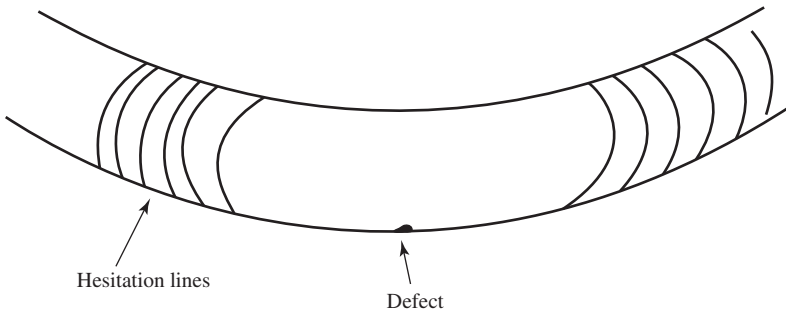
Sketch of fracture surface appearance in vicinity of fracture origin.
